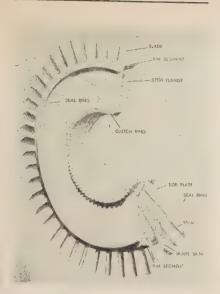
Typical sheet metal rotor for axial flow compressors made by Stalker. This unit, it's stated, weighs 30 lb, as against 75 lb for its machined counterpart, and costs about 10 per cent less to make.
